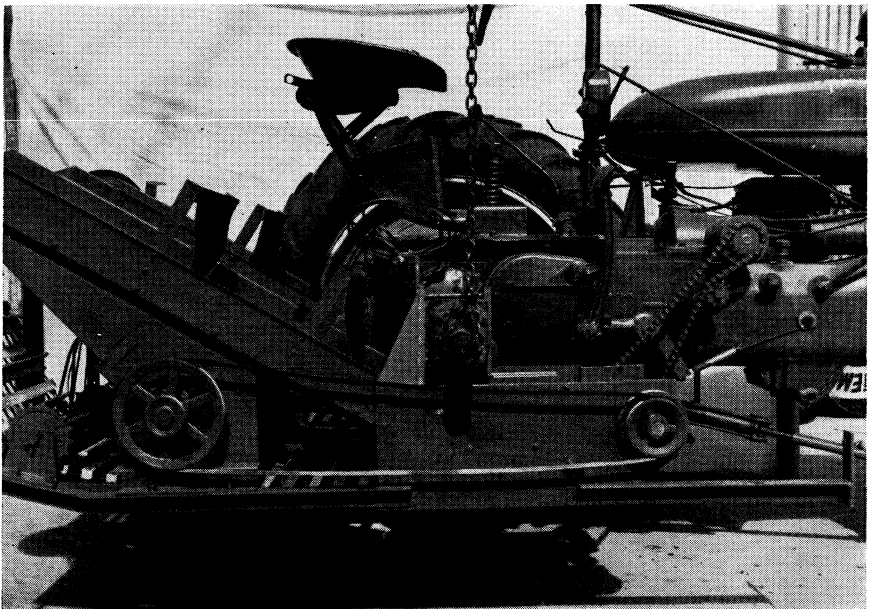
View shows rear unit of harvester and method of attachment to rear axle frame of tractor.
